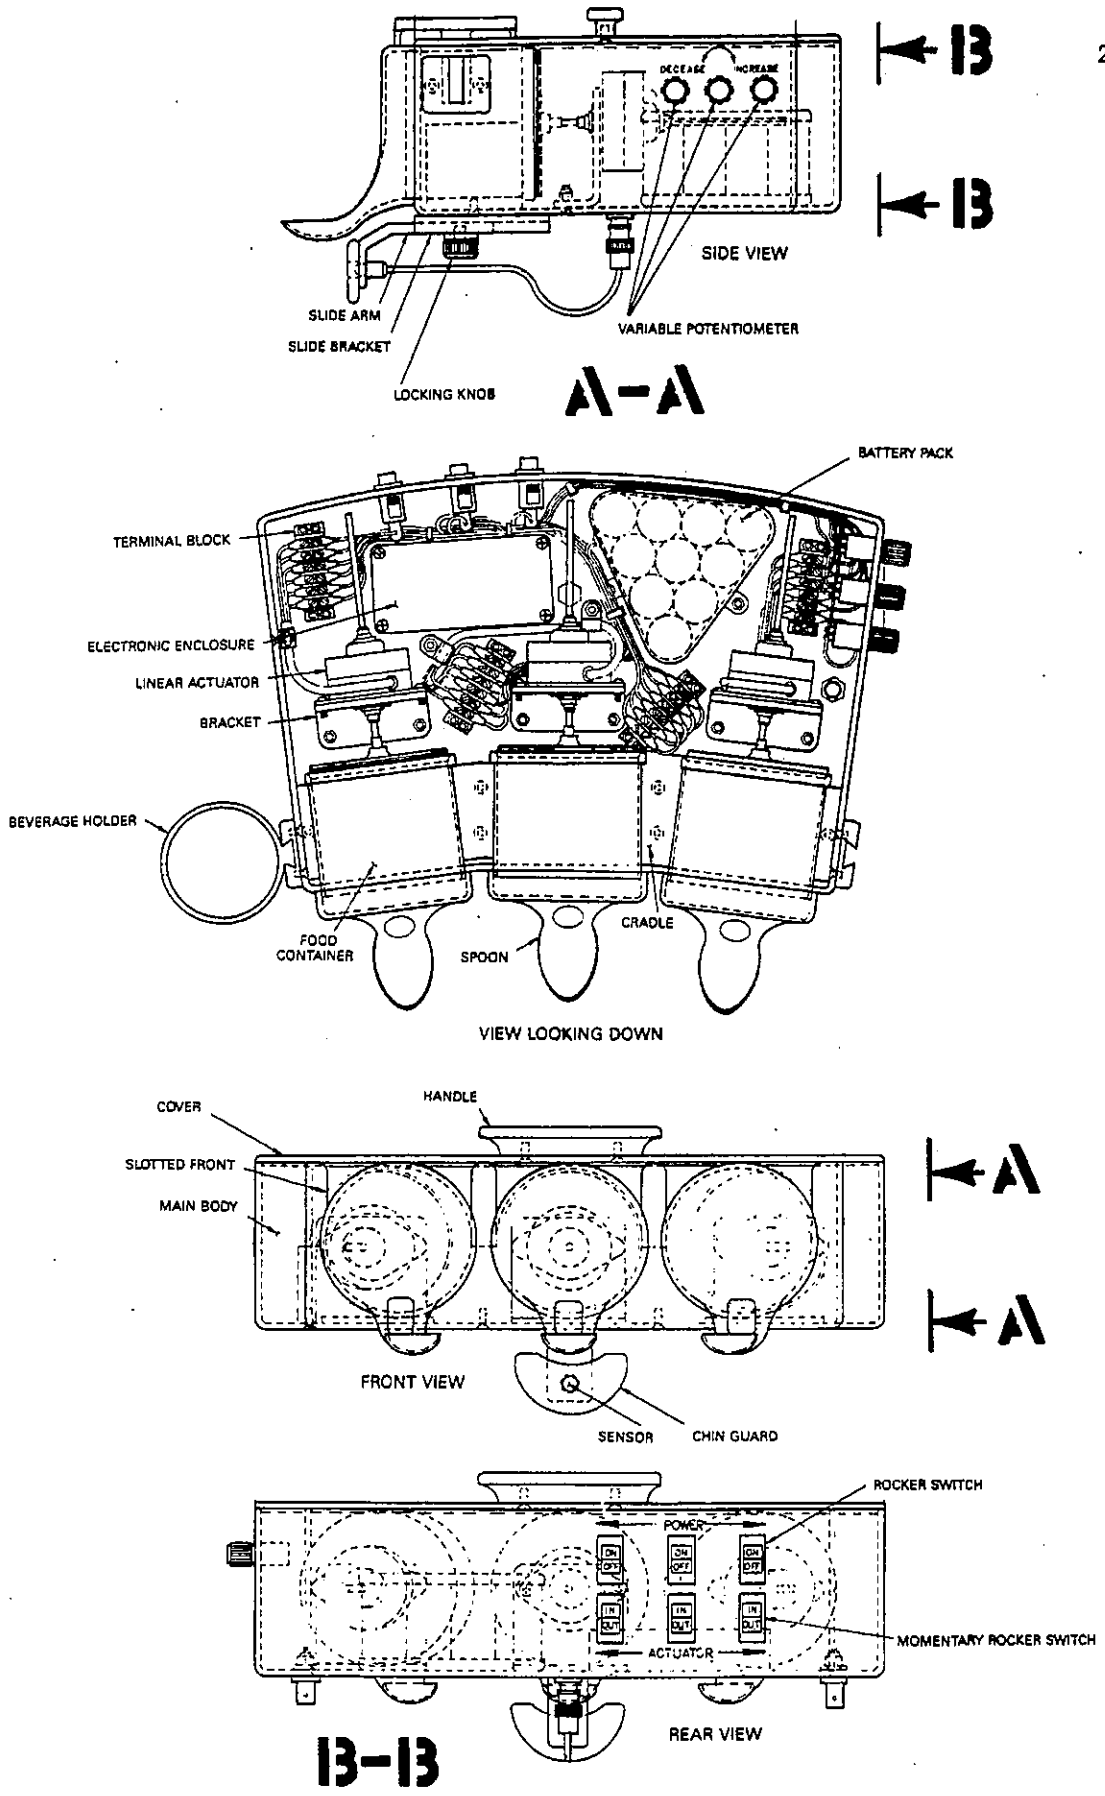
UNITIZED THREE DISPENSING MODULE PACKAGING AND ENCLOSURE
